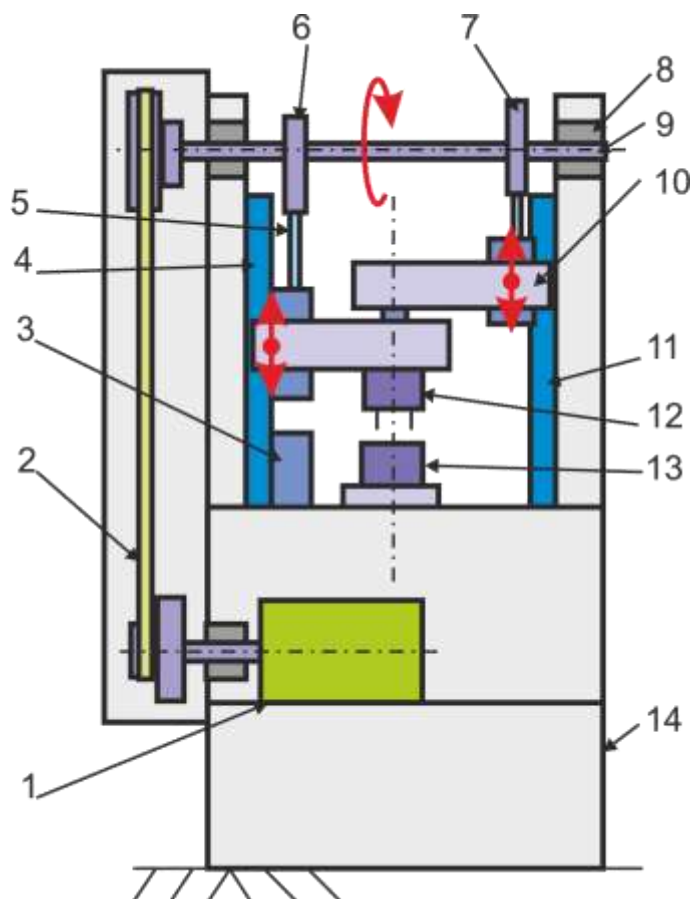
Kopal's squeezer press: 1 - electric motor, 2 - belt drive, 3 - shear blade, 4 - slide, 5 - adjustable rod, 6 - cam for moving the upper part of the mould, 7 - cam for the punching mechanism, 8 - shaft bearing, 9 - drive shaft, 10 - punching mechanism, 11 - needle bar slide, 12 - upper part of the mould, 13 - lower part of the mould, 14 - machine frame
